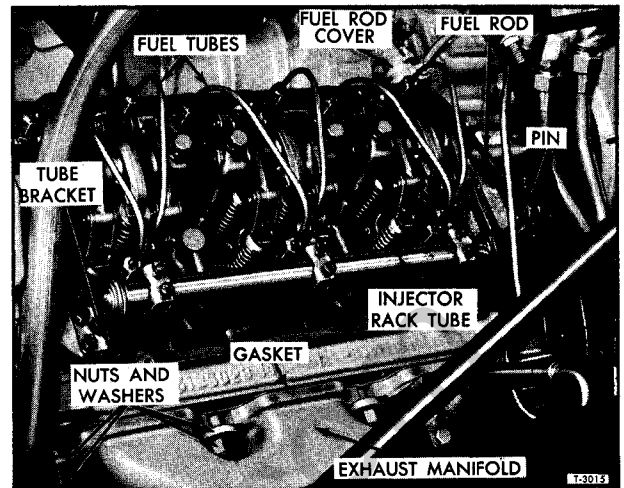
6V-53 Engine with Left Hand Rocker Arm Cover Removed
